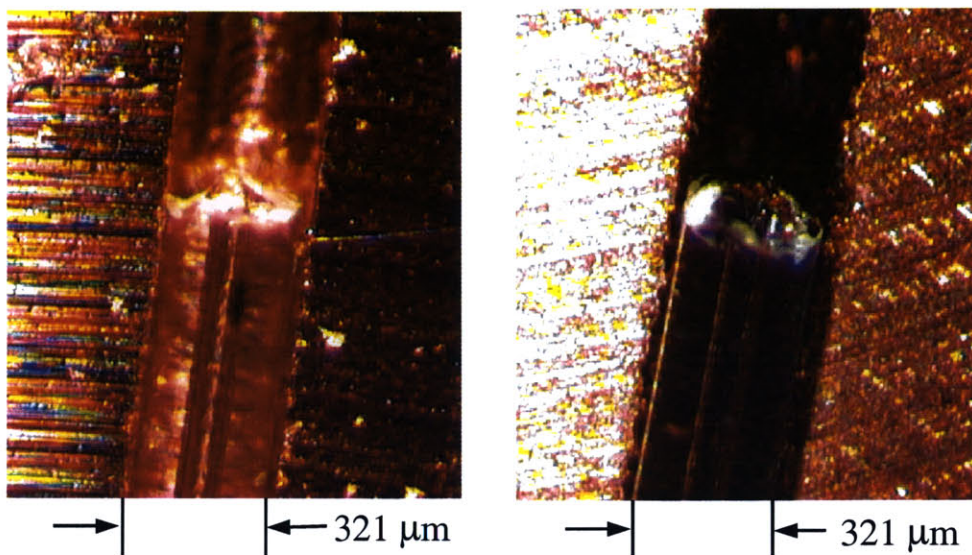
Capillary end in groove machined by milling (left) and Electrical Discharge Machining (right).
